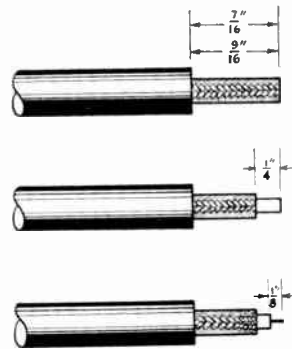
Stripping dimensions for Amphenol 82-830 and 82-832 plug-in connectors. The longer exposed braid is for the first type.
